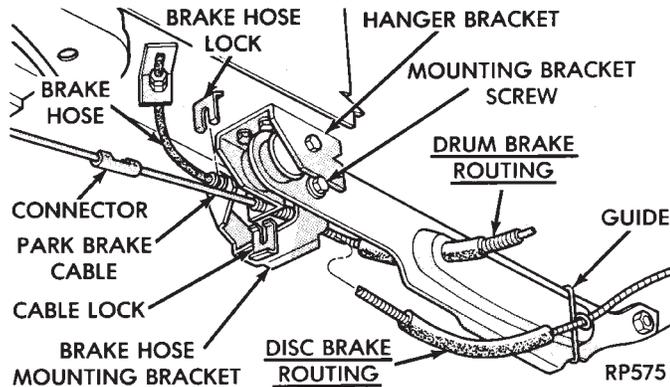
Remove Brake Hose Mounting Bracket Screw and Park Brake Cable
